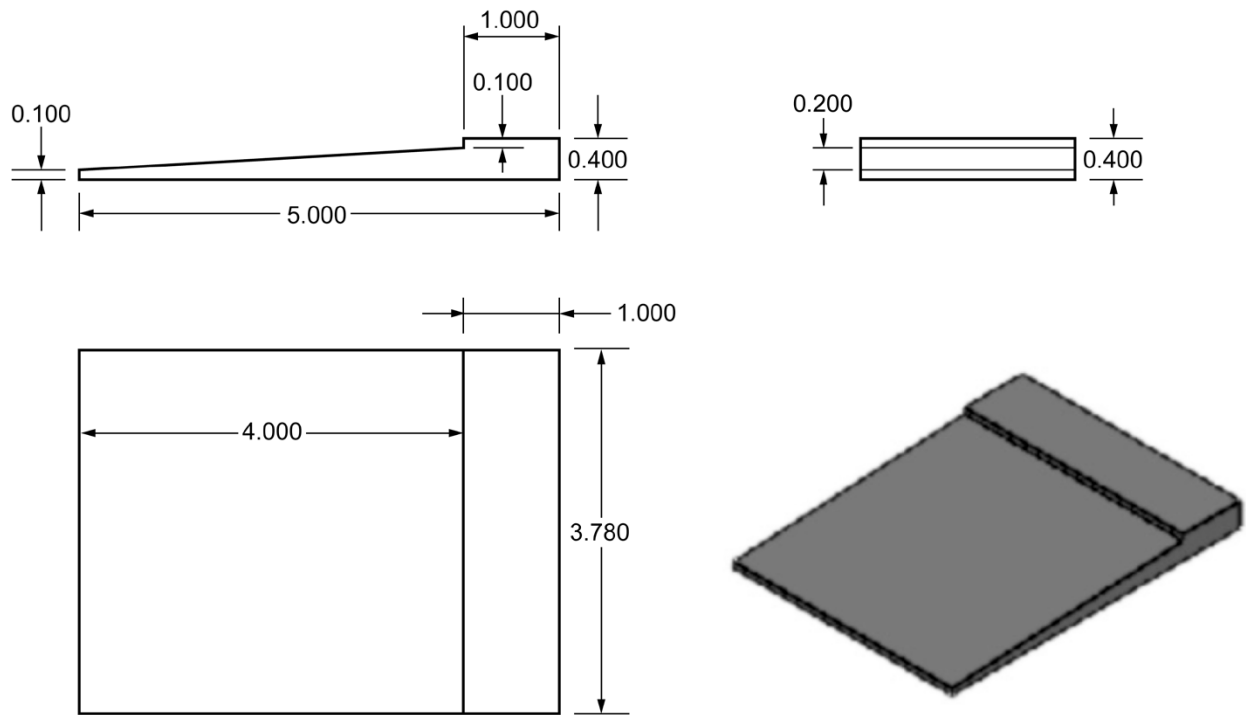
Projectile used in the Large Panel Impact Tests. (Dimensions in inches.)
